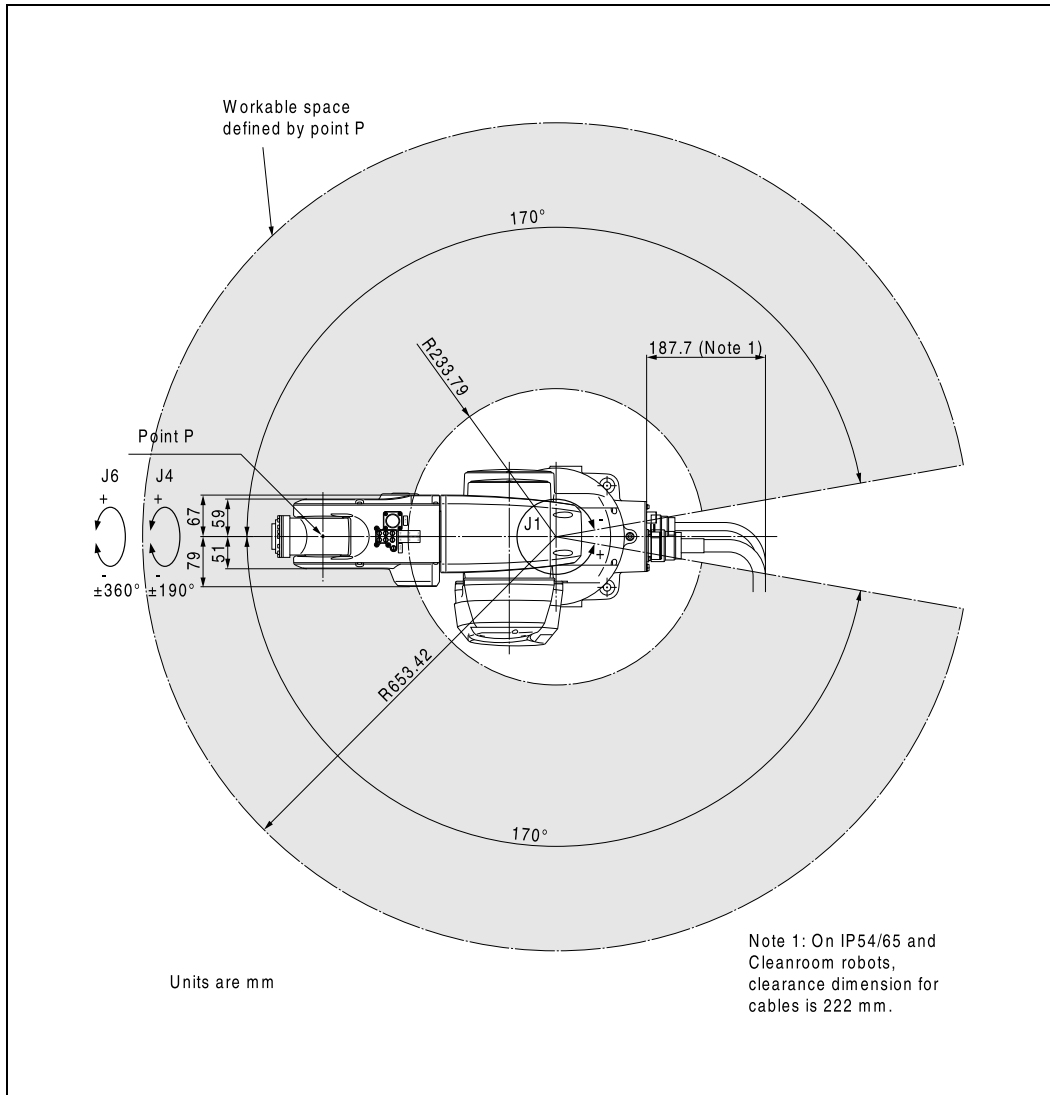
Viper 650 Top Dimensions and Work Envelope
